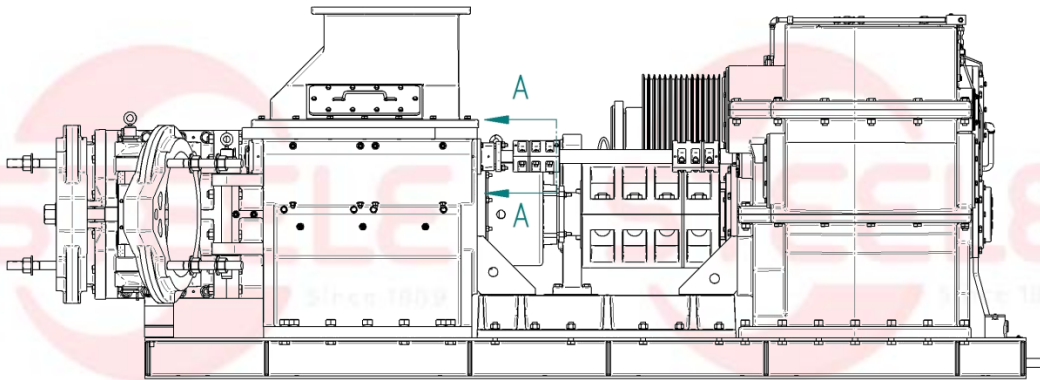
Side view of the 90AD Extruder with the feed roll shear pin labeled.
